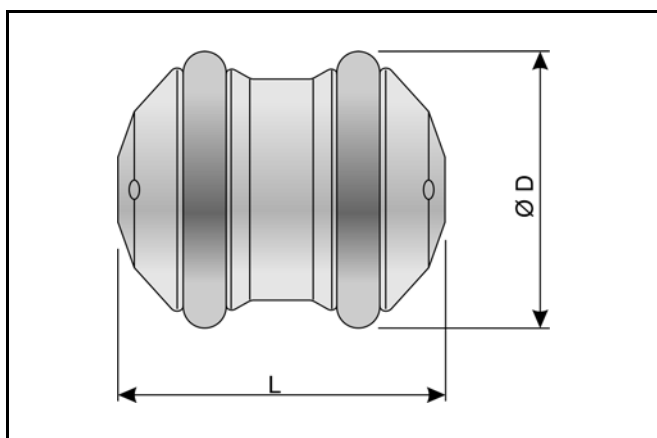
Dimensional drawing of the TWIN 3 pig
